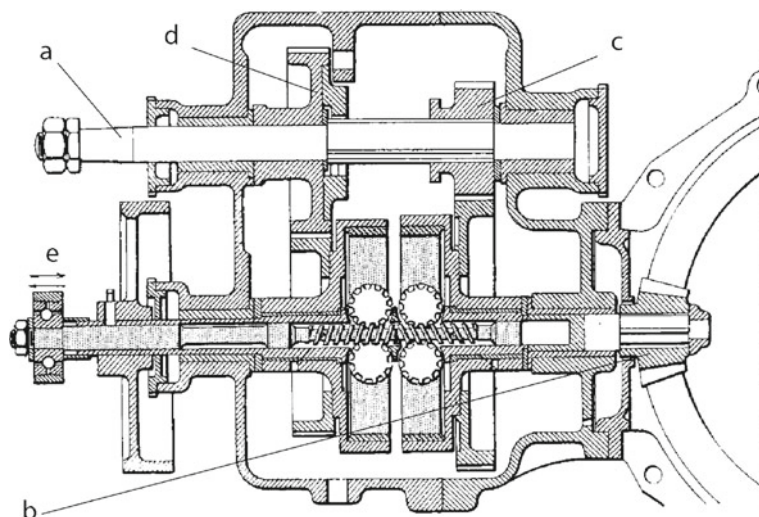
The De Dion & Bouton gearbox can be considered as a precursor to power-shift gearboxes. By shifting a shaft with the bearing *e*, it is possible to engage one of the two shoe clutches available on each gear; a start-up clutch is not required (redrawn from Genta and Morello 2009)
